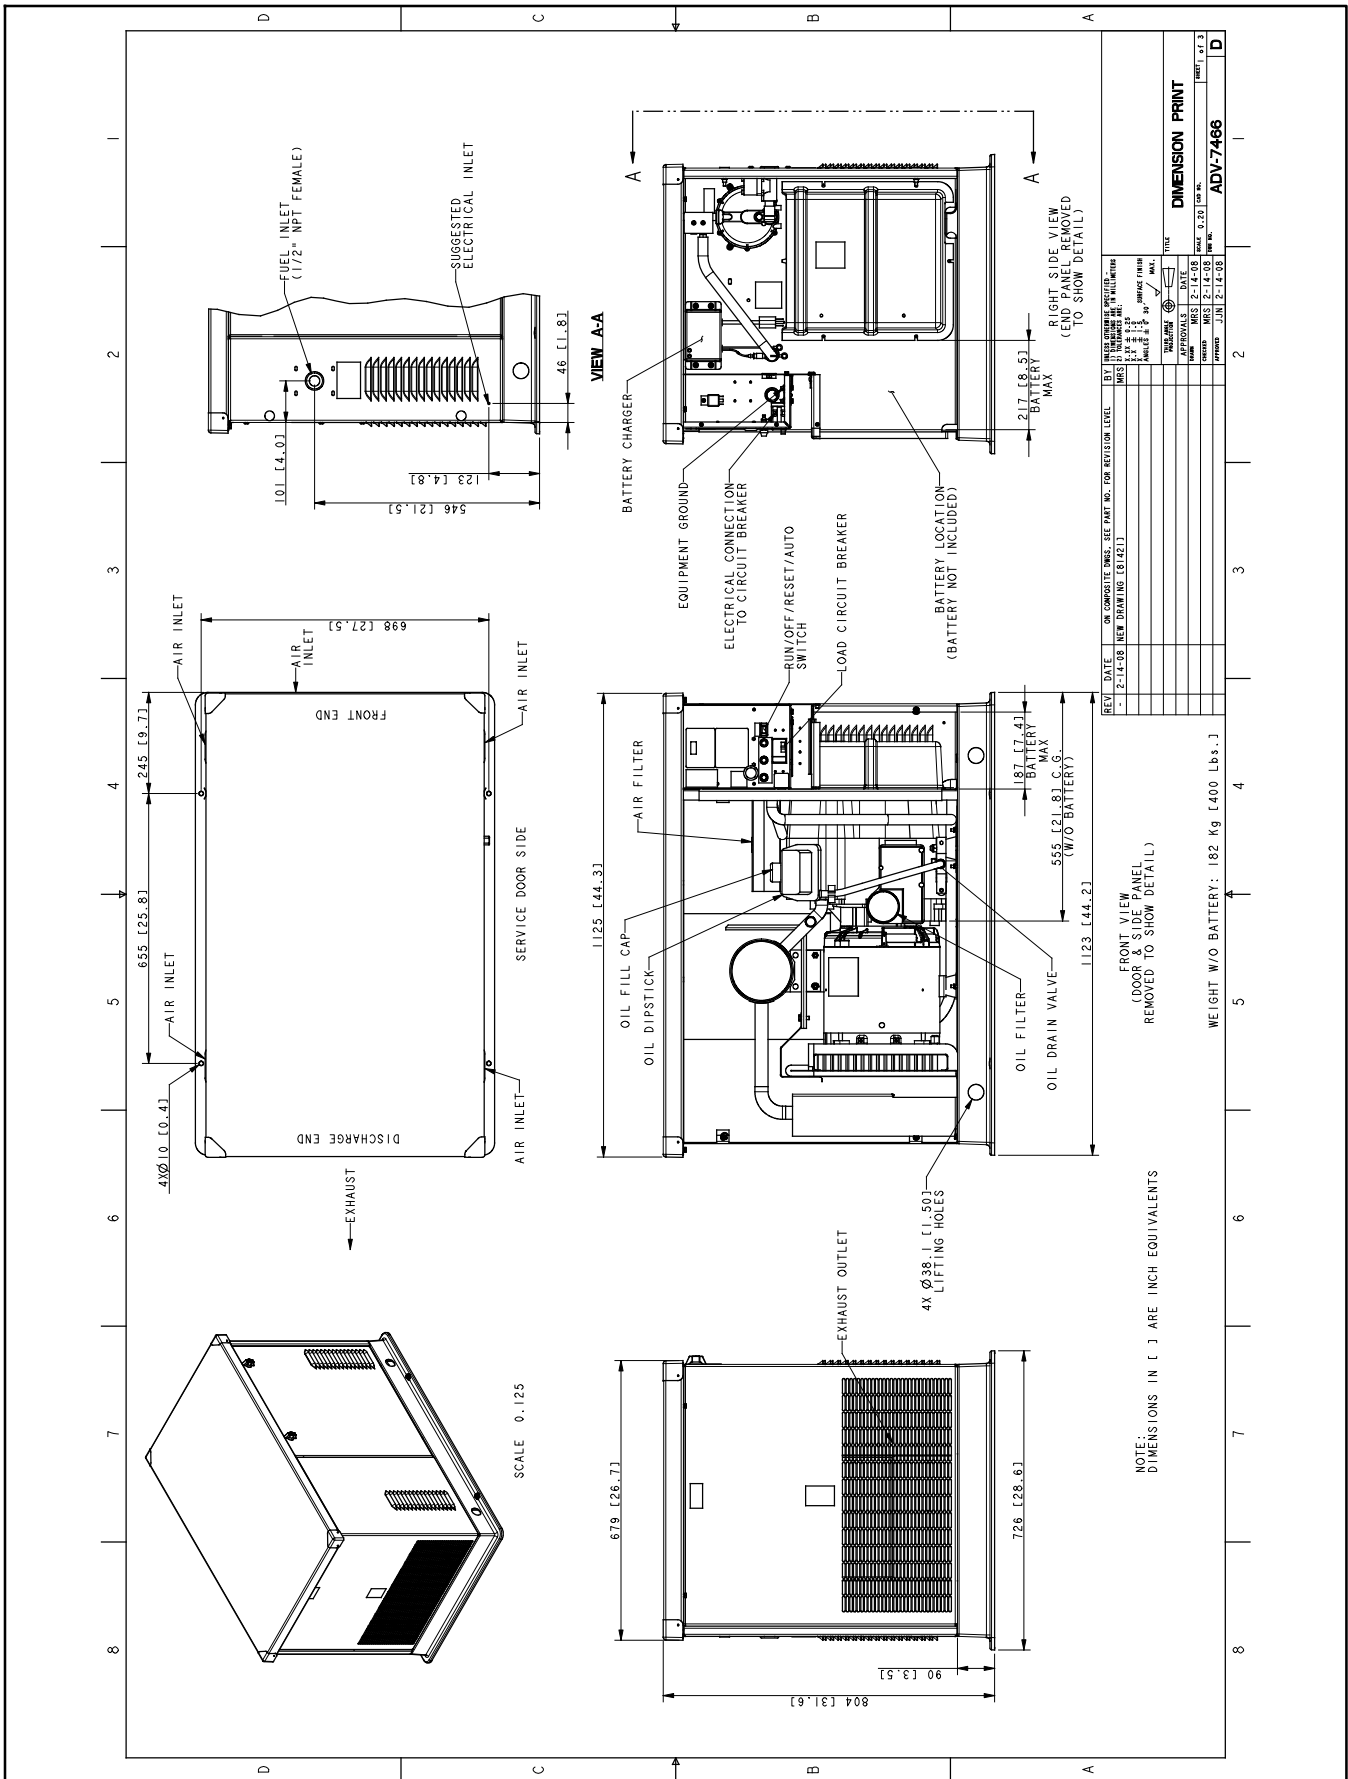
Generator Set Mounting Details and Dimensions, 8.5RES, 12RES, and 12TRES (3-phase), ADV-7466, Sheet 1
